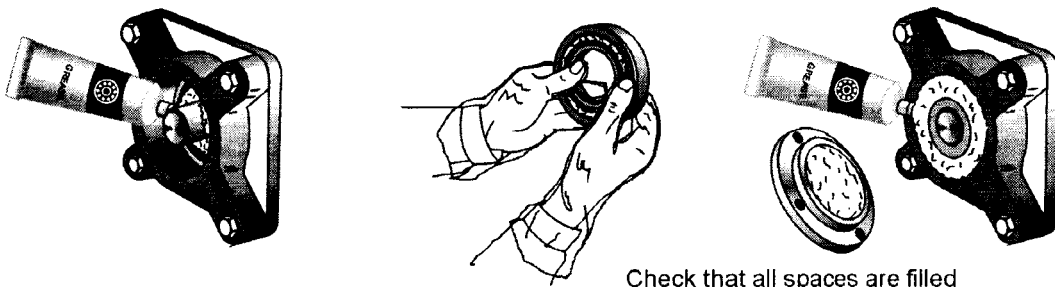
Grease packing separable and non-separable anti-friction bearings.
